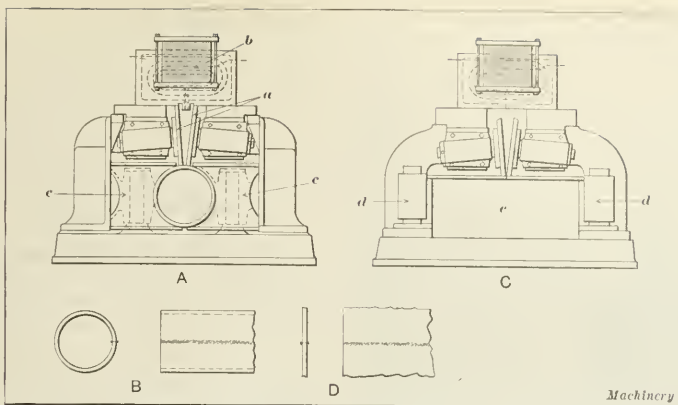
Diagram illustrating Two Types of Butt Seam Welders built by the Thomson Electric Welding Co.
